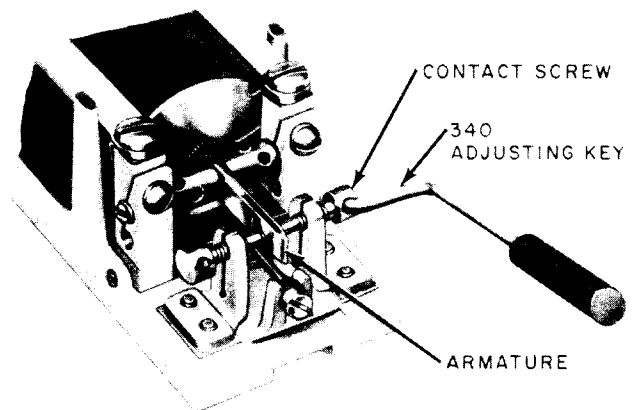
Method of Aligning Contact Travel (Old Style Illustrated)
